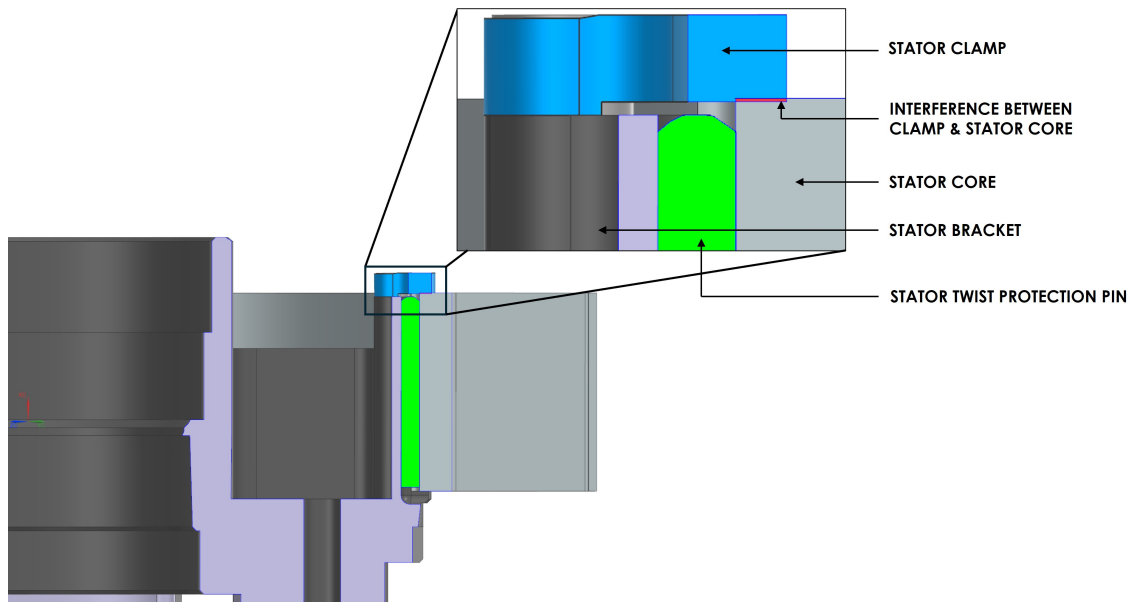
Clamping arrangement from the Hacker Q150 motor shown in sectional view
